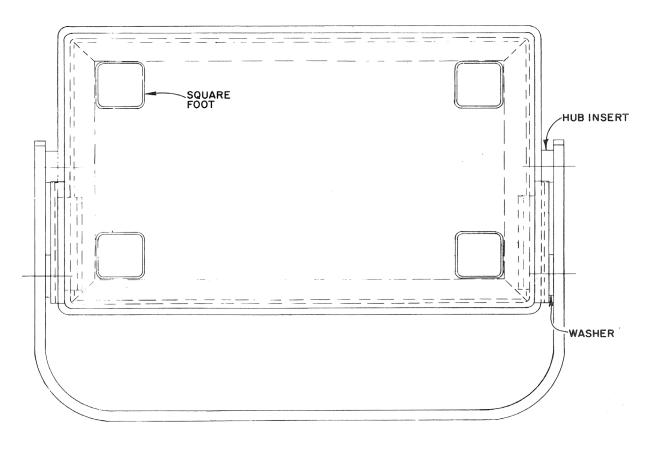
Complete cabinet assembly (P/N 4182-2328)
